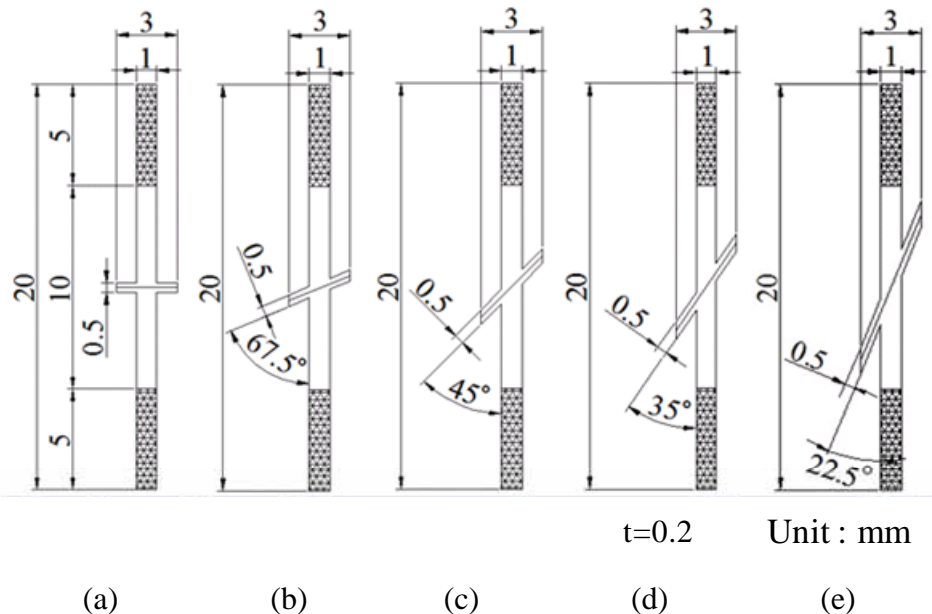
Schematic of cruciform specimens. (a) cruciform-90, (b) cruciform-67.5, (c) cruciform-45, (d) cruciform-35 and (e) cruciform-22.5
